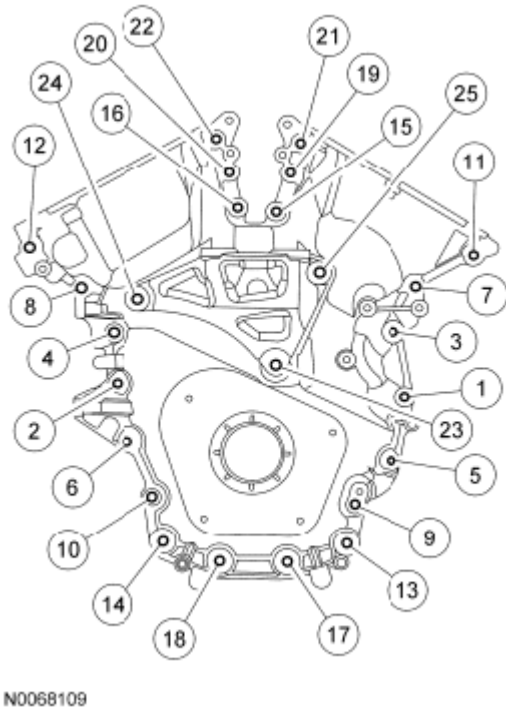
Identifying Engine Mount Bracket Bolt Tighten Sequence
